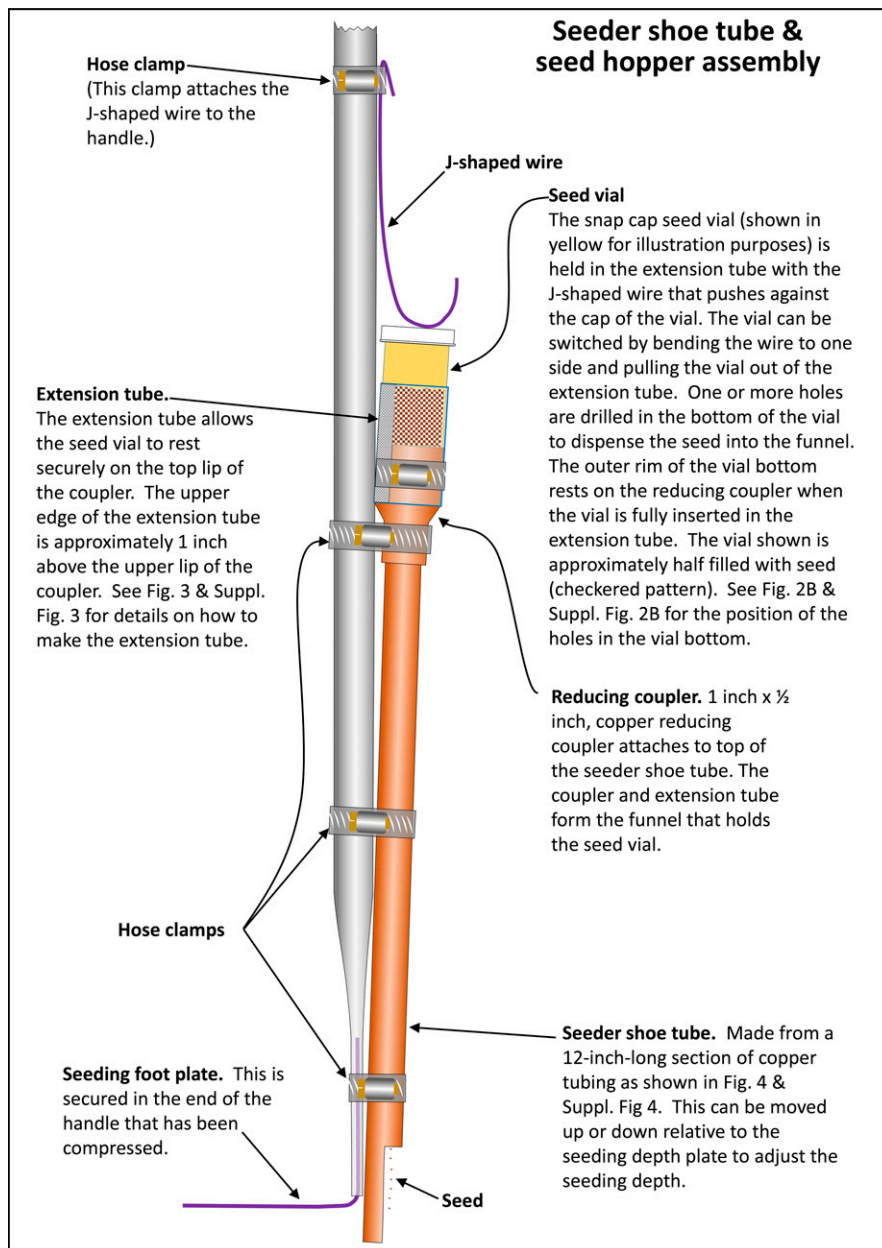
Detailed illustration of the seeder shoe tube and seed hopper assembly of the slide hammer seeder; 1 inch = 2.54 cm. See Supplemental Fig. 5 for enlarged, color version.
